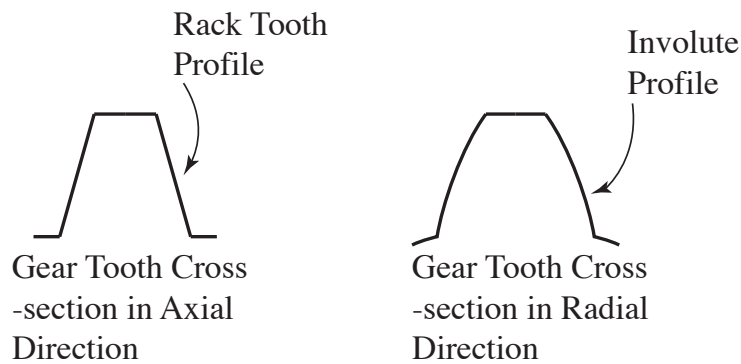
The gear teeth are shaped like a rack tooth in the axial direction, but have an involute spur gear profile in the radial direction.
